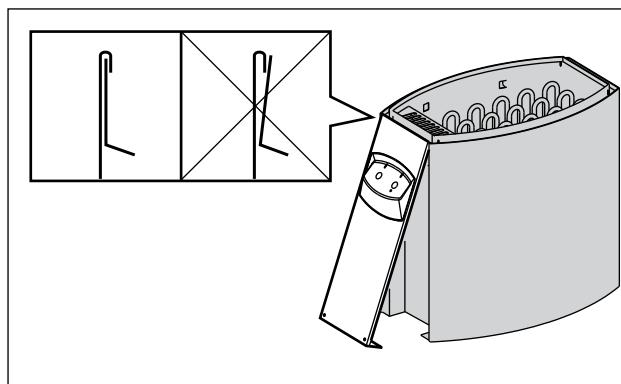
Closing the cover of the connection box (all dimensions in millimeters)
